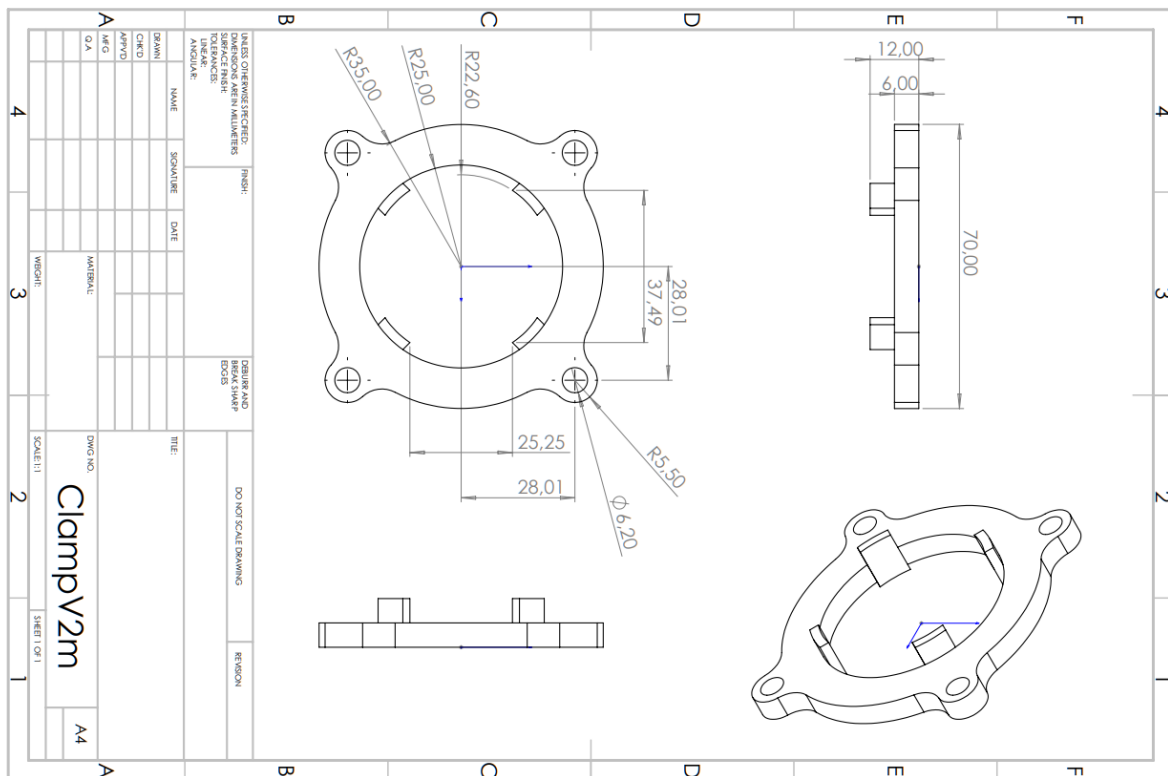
Technical drawing of the second (and final) version of the Clamp, male part of the set.
